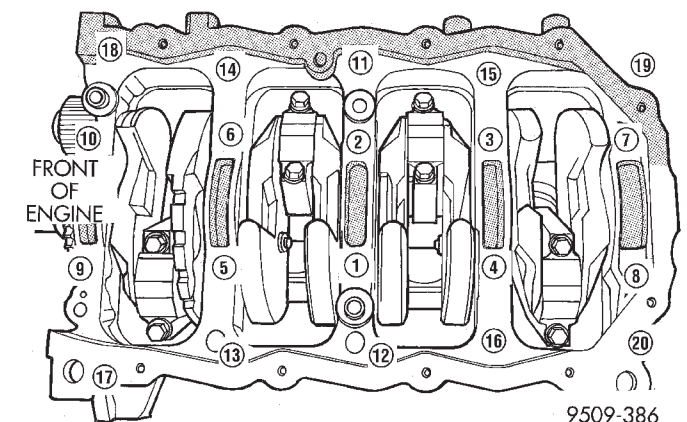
Main Bearing Caps/Bedplate TorqueSequence
